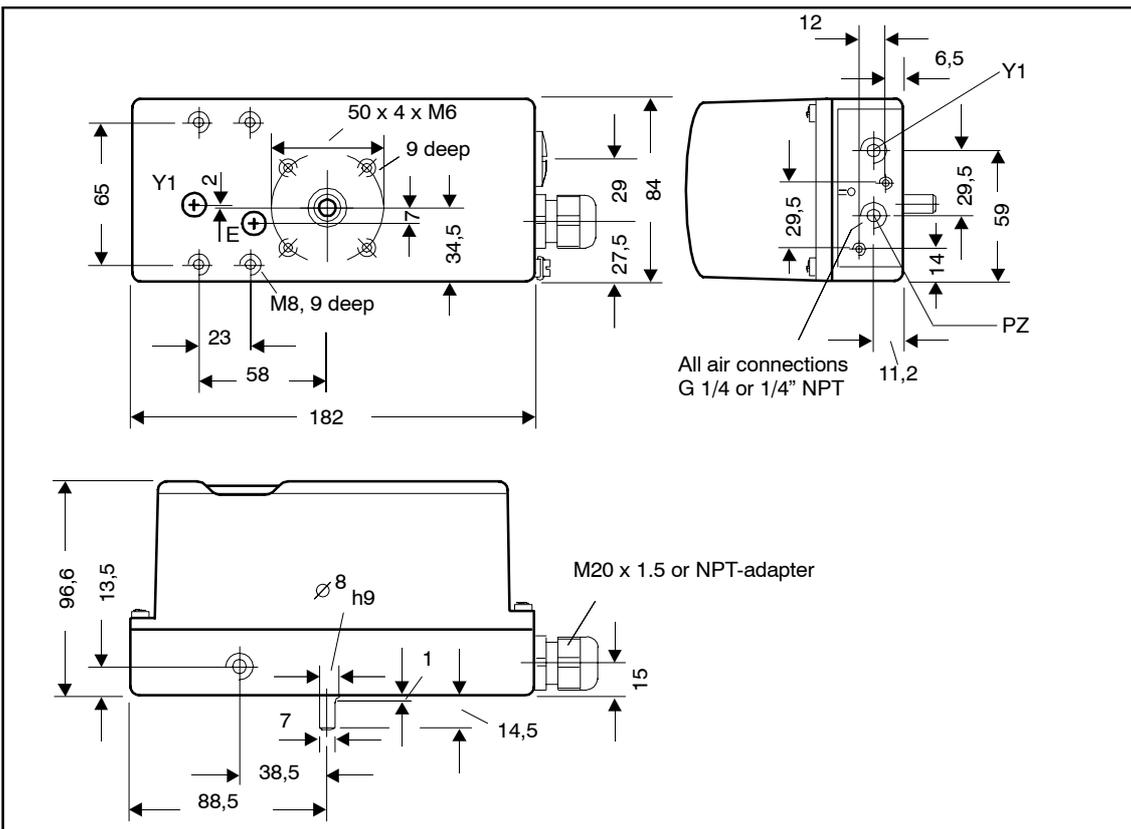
Dimensional drawing version metal housing 6DR5xx1
